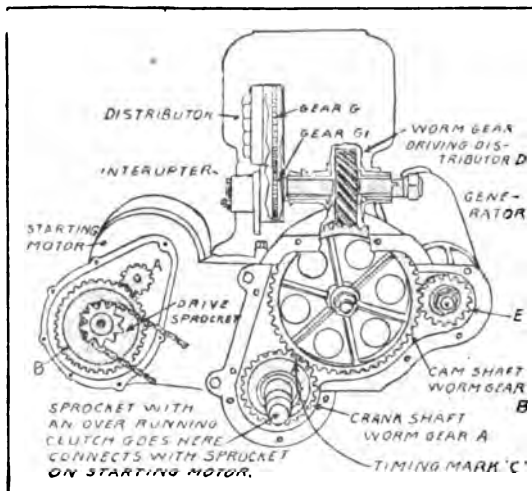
Note the gear G, is driven by gear G1 which in turn is driven by a spiral worm gear from the cam gear. This system was used on the Studebaker six. See above, for relative speed of interrupter cam (D) and distributor brush (R). (Studebaker generator is now driven in a vertical position and ignition is as per pages 368, 350, 372.)
